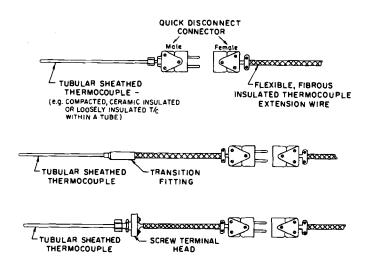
Typical examples of thermocouple assemblies using quick disconnect connectors.
